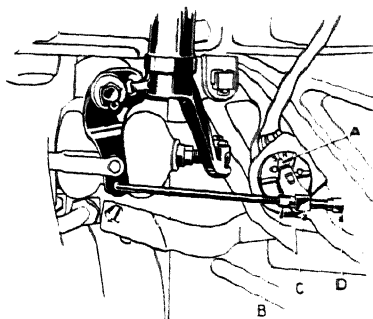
CROSS-CHANGE MECHANISM ADJUSTMENT
